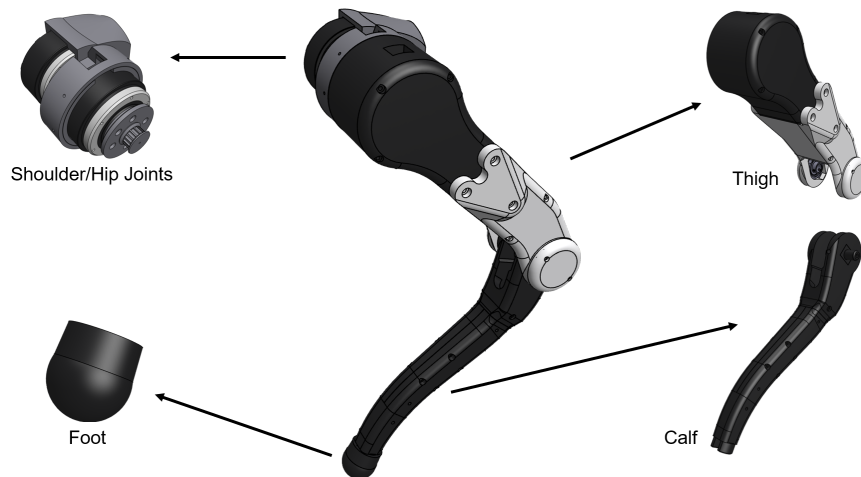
The whole leg consists of four parts: should-hip joint connector, thigh, calf and foot. All 3D printed and made of PLA materials except the feet are TPE.
